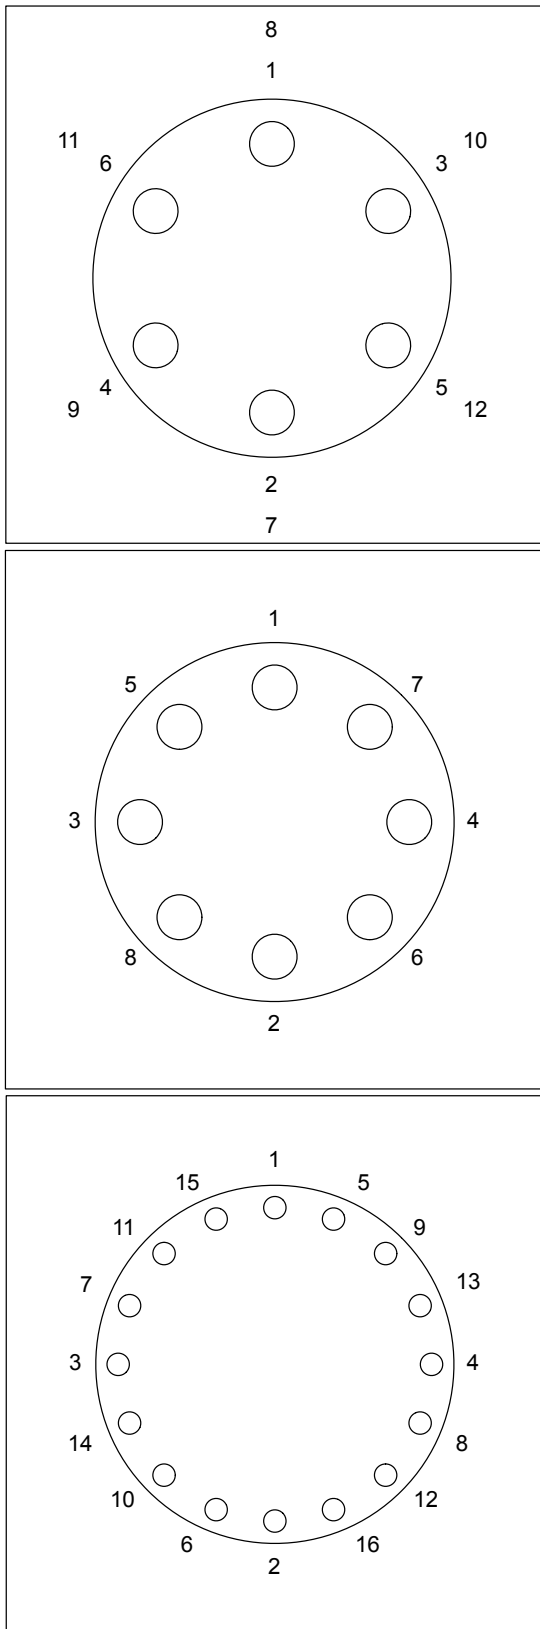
The order in which to tighten bolts on ConFlat flanges with 6, 8, and 16 screws.
